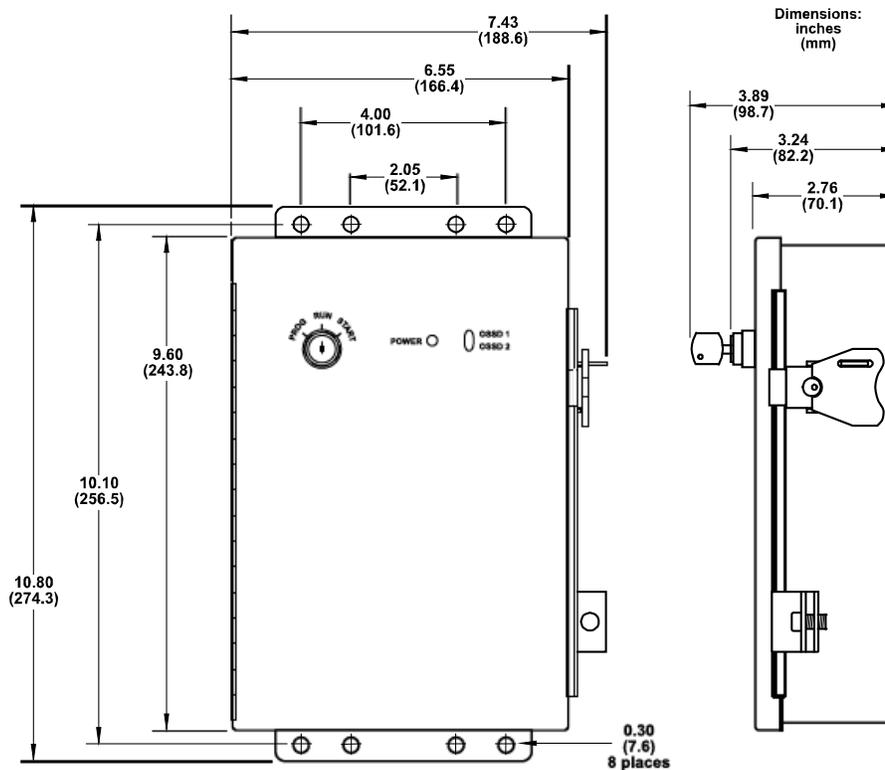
Shadow 9 Control Box: Mounting Dimensions
